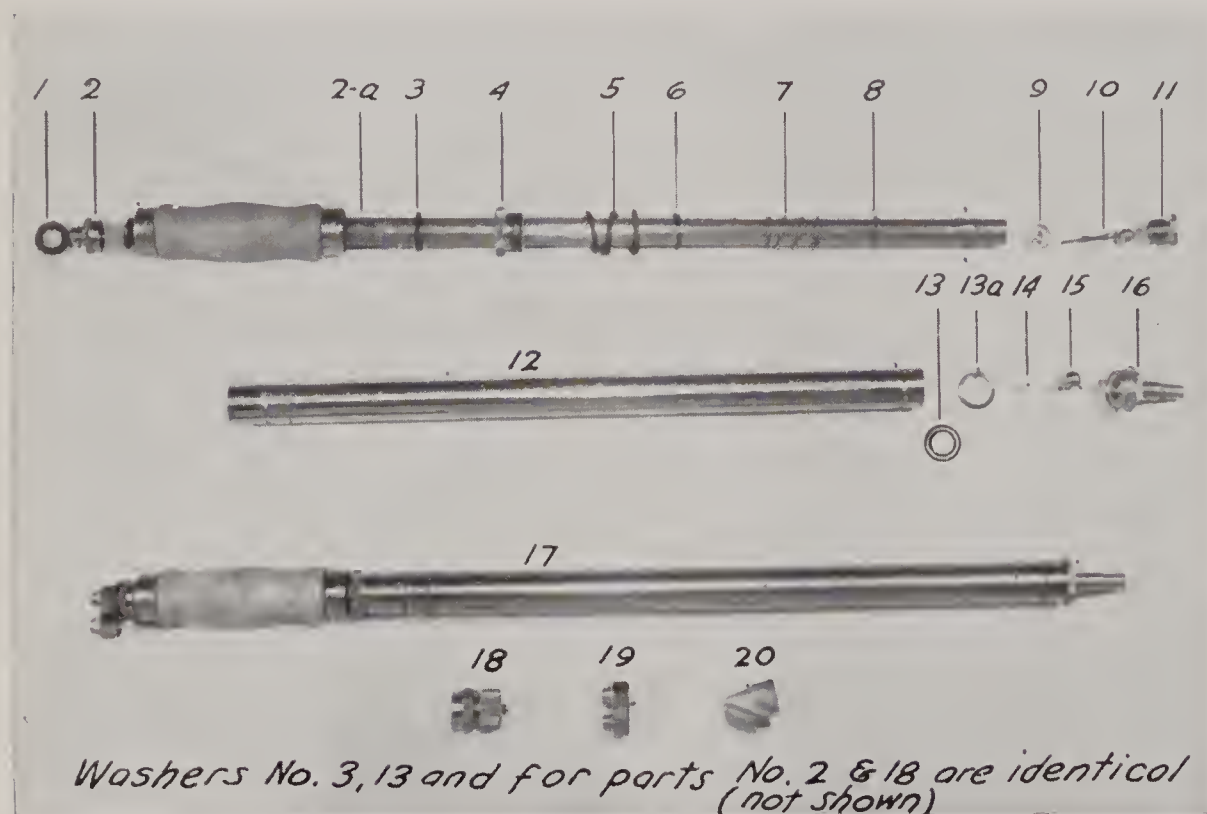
Back-pack hand pump showing component parts and three types of nozzles.
